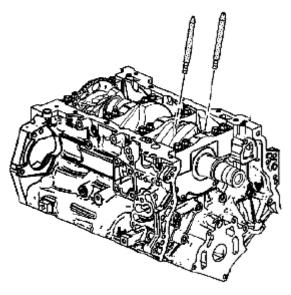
Identifying Connecting Rod Cap Courtesy of SUZUKI OF AMERICA CORP.
